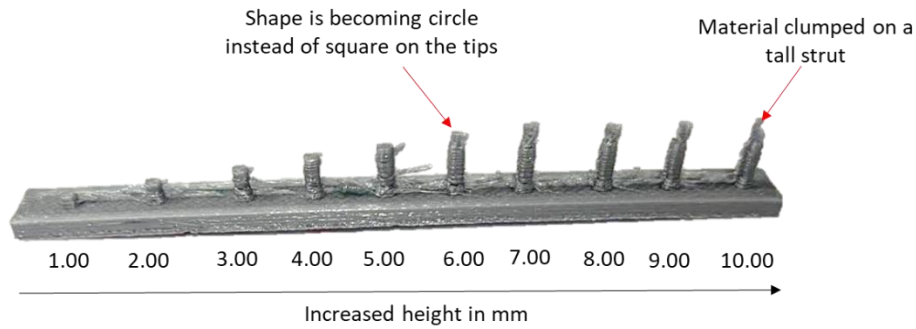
Printed struts with dimensions of A equal to 1.50 mm
